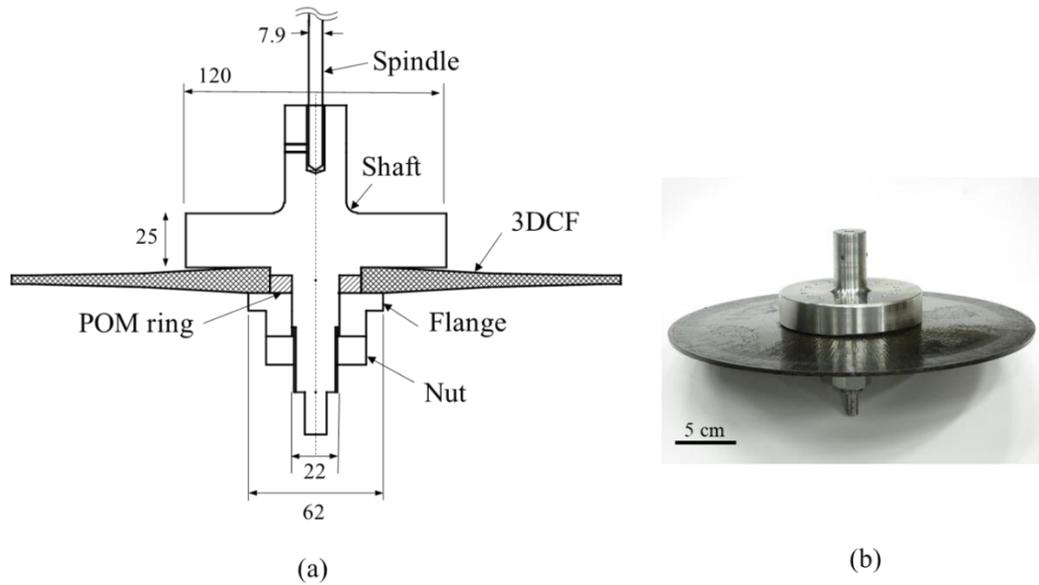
Test fixtures for spin tests in which POM ring is inserted between 3DCF and shaft : (a) assembled fixtures , and (b) outlook of the specimen with the fixtures.
